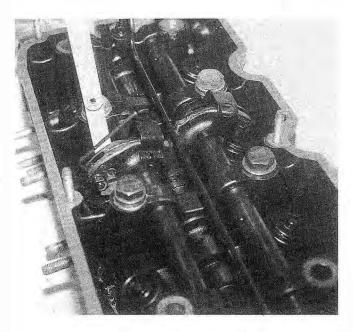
Valve clearance being measured. Feeler gauge is inserted between rocker arm eccentric and valve.
